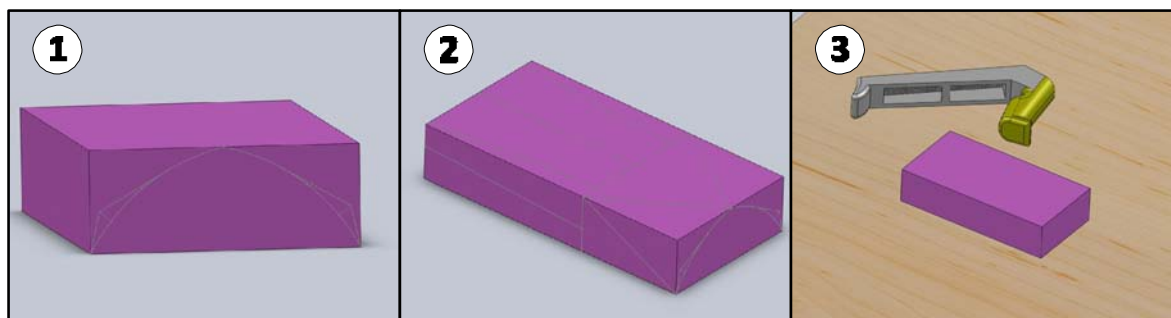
Layout and cut a block- (1) Use a combination square to mark out the lines. (2) Finished layout of the block. (3) Cut the block out using a hacksaw.
